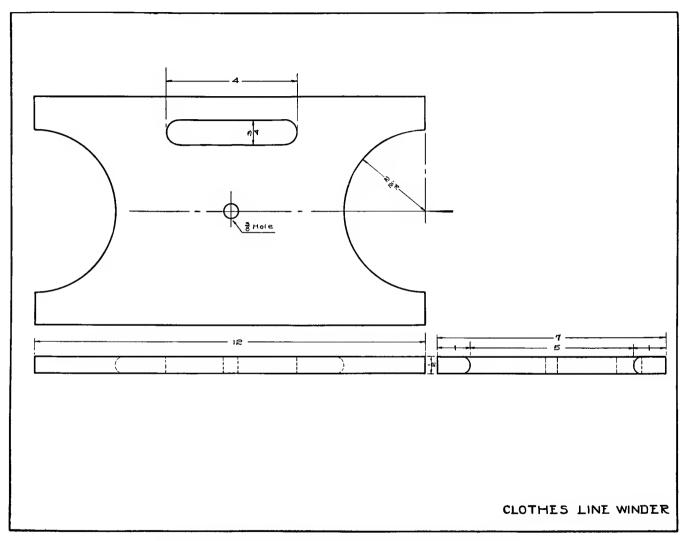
Working Drawing for Clothes Line Winder (Sixth Grade)
